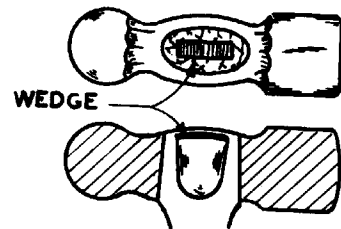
HANDLE SECURELY FASTENED TO HEAD
